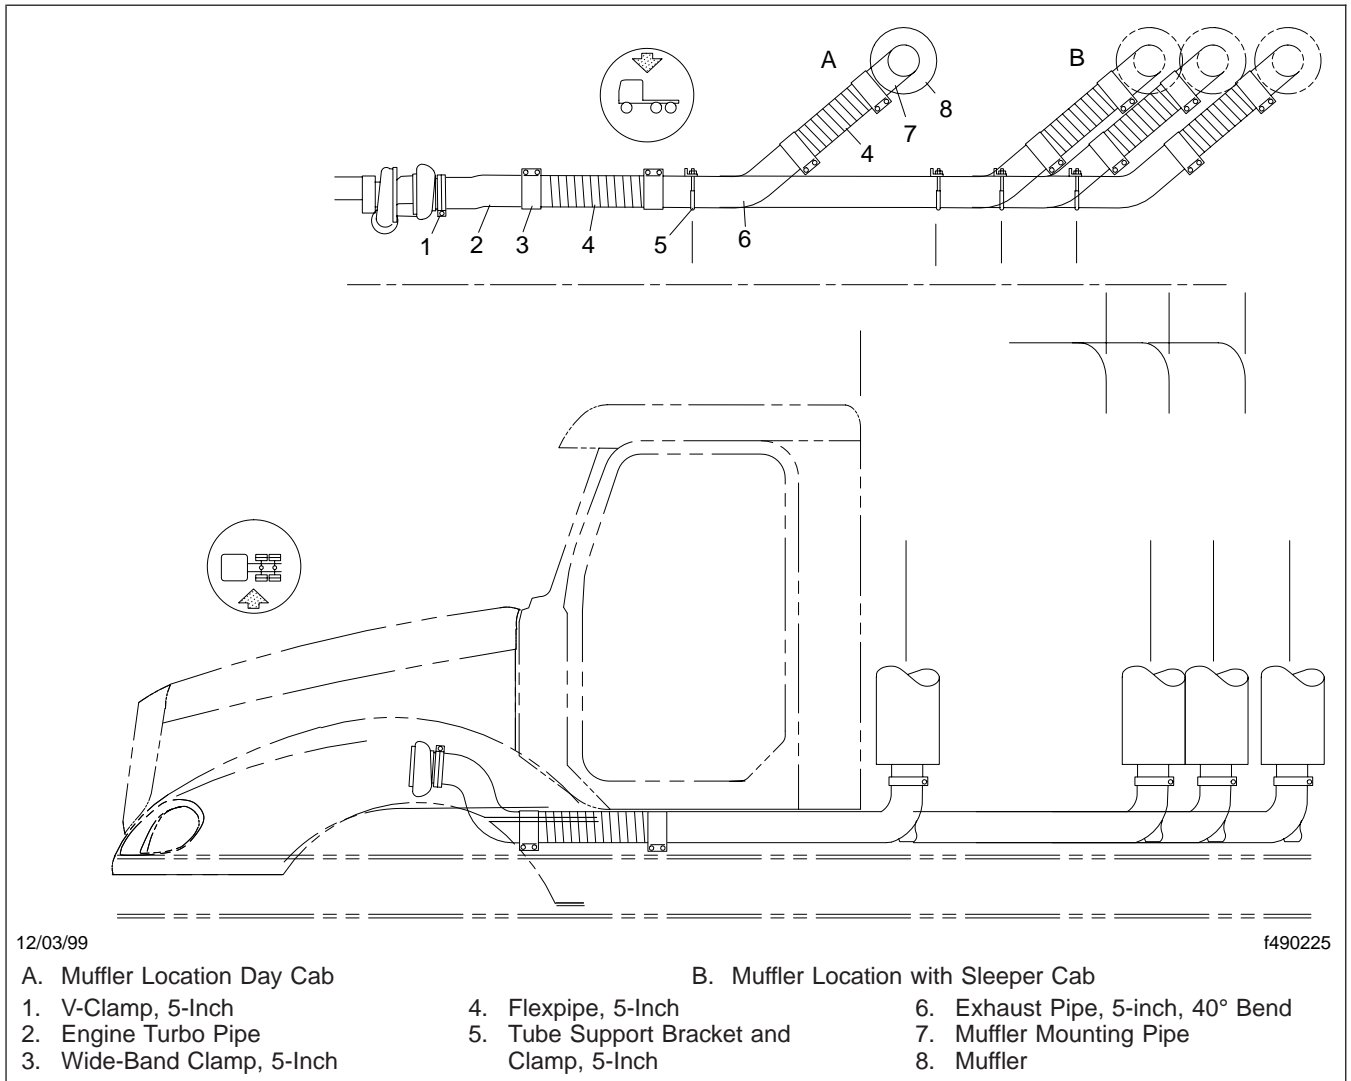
, Exhaust Piping for Cab and Frame-Rail Mounted Muffler
